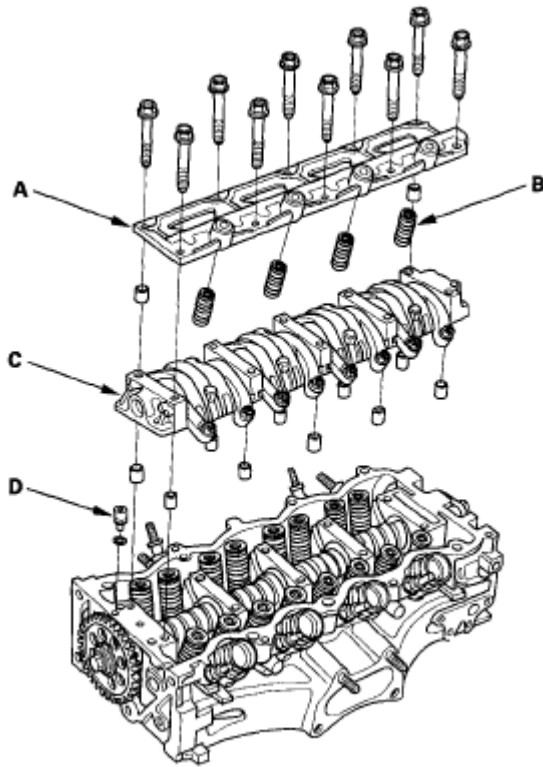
Identifying Lost Motion Holder And Lost Motion Assemblies
